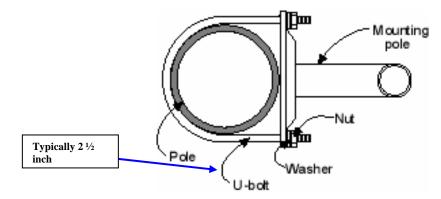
Mounting Pole Installed on Pole or Antenna Mast
